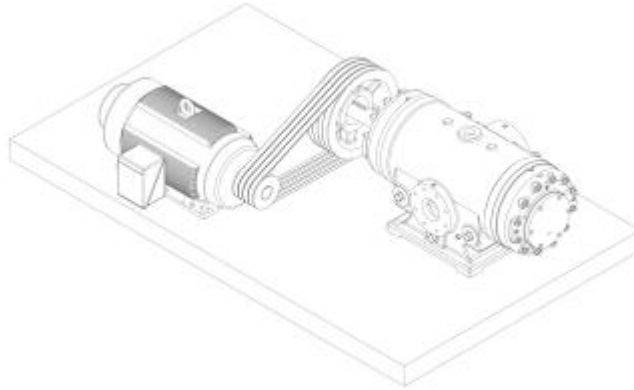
V-belt drive with sheave mounted directly on compressor shaft.
